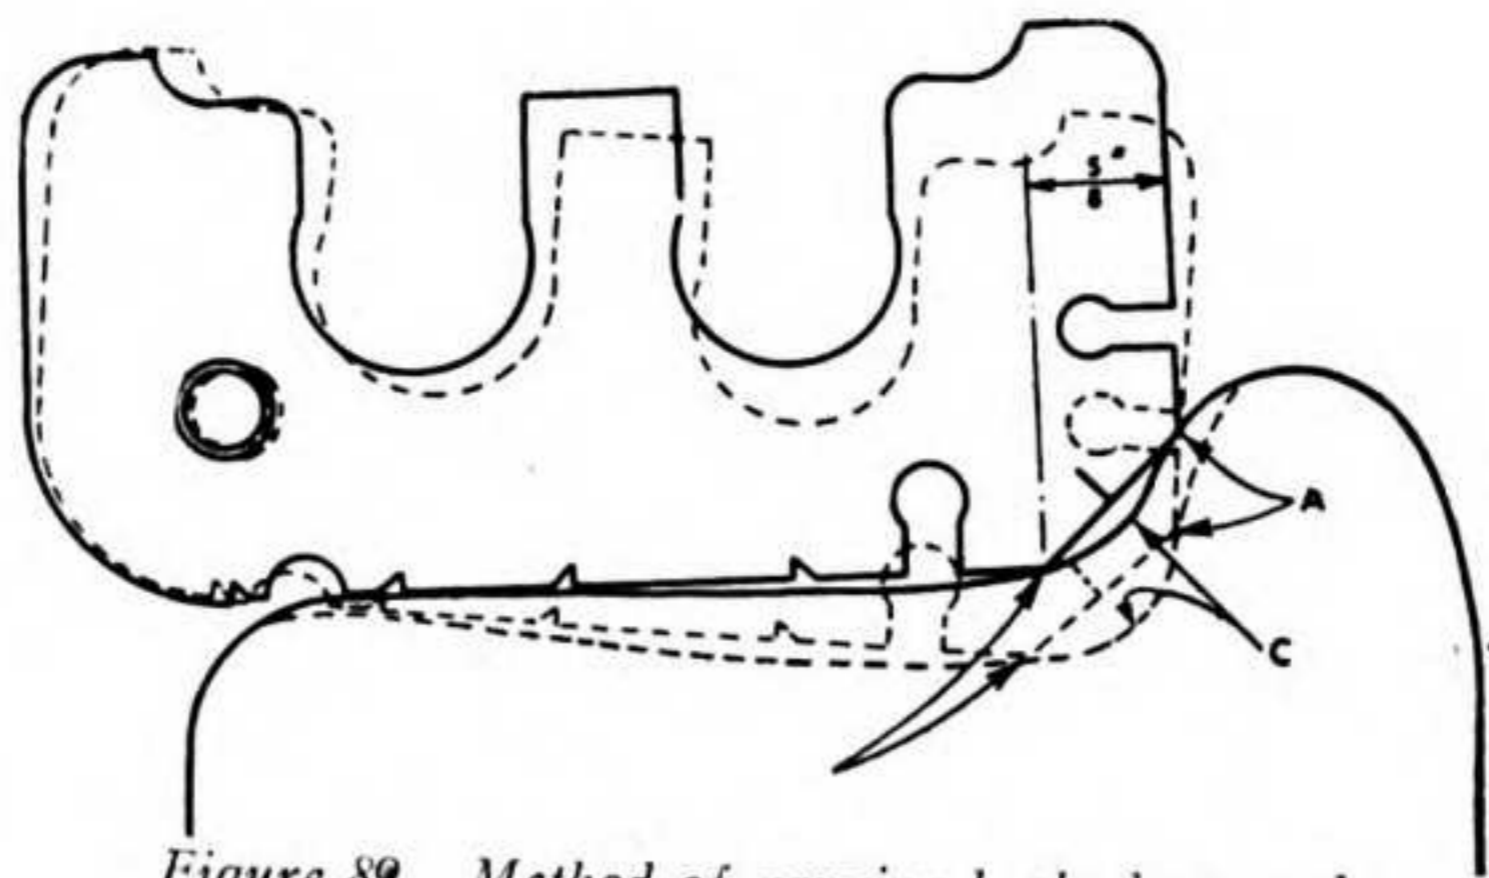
Method of gauging brake burn and transverse cracks, cast-iron wheels.
